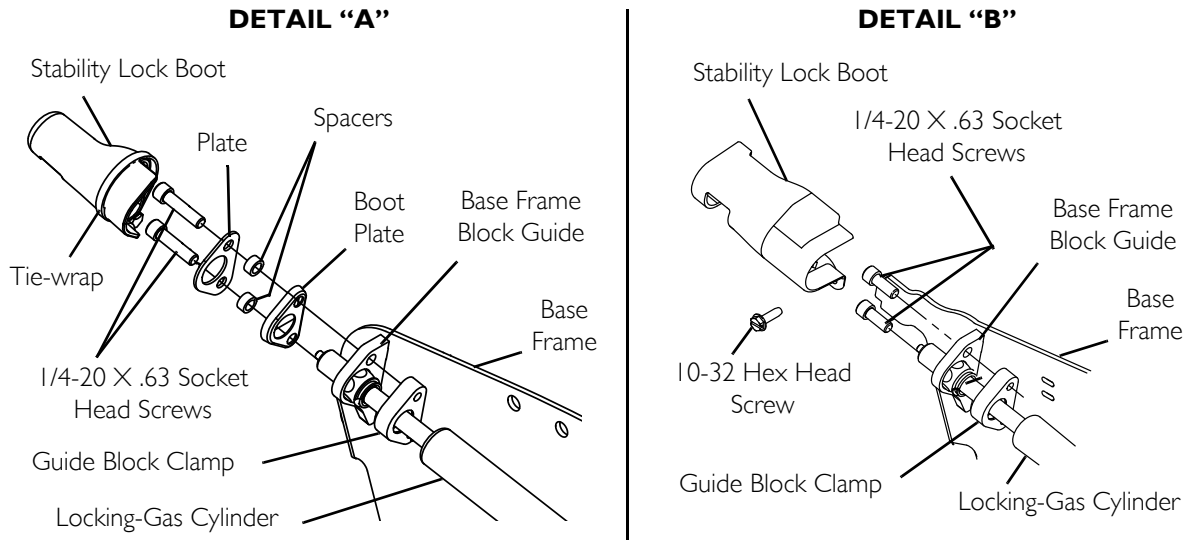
Removing/Installing The Locking-Gas Cylinder Assembly
